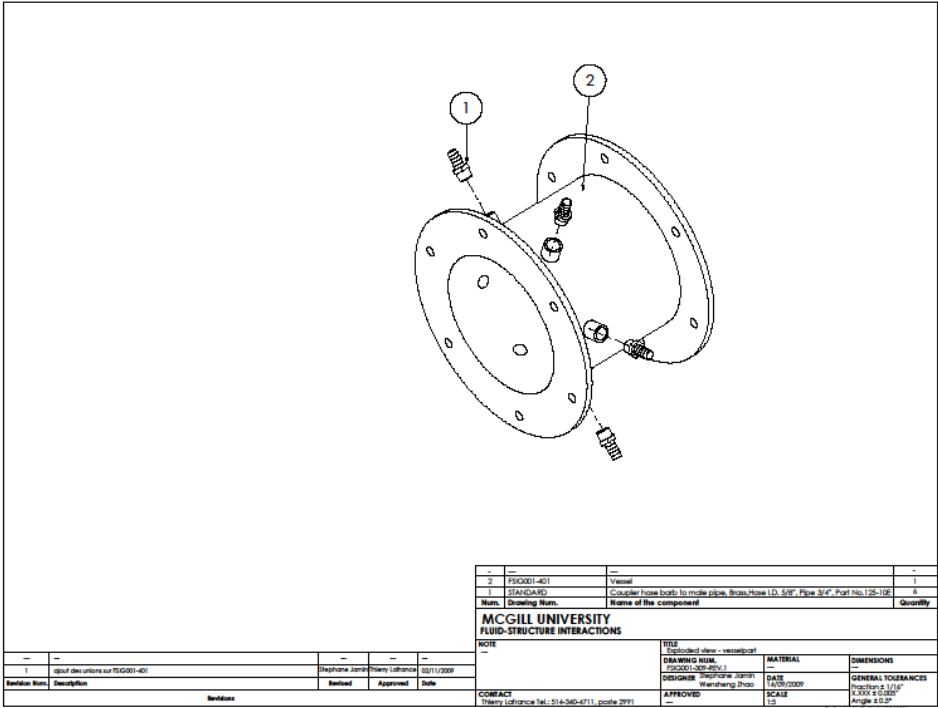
Sub-assembly drawing for the vessel: Vessel part
